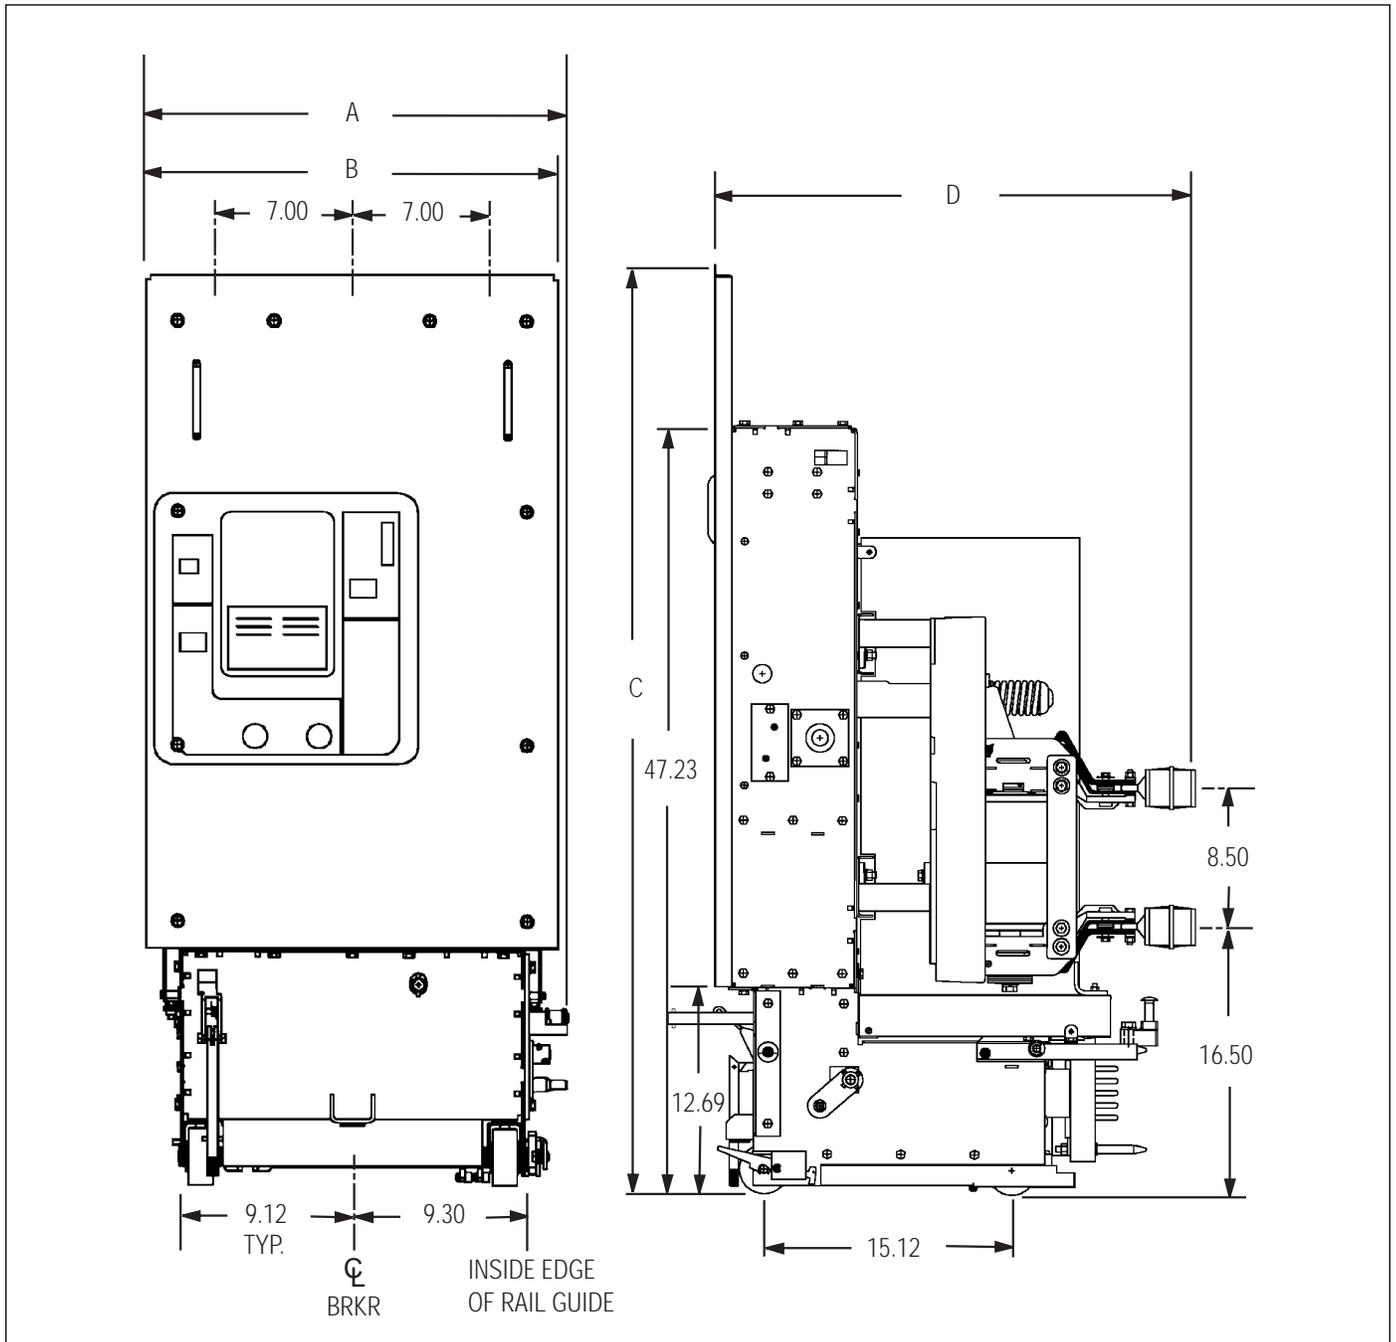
Outline and Dimensions (inches) Type DHP-VR Breakers (5 kV, 350 MVA Rating)
